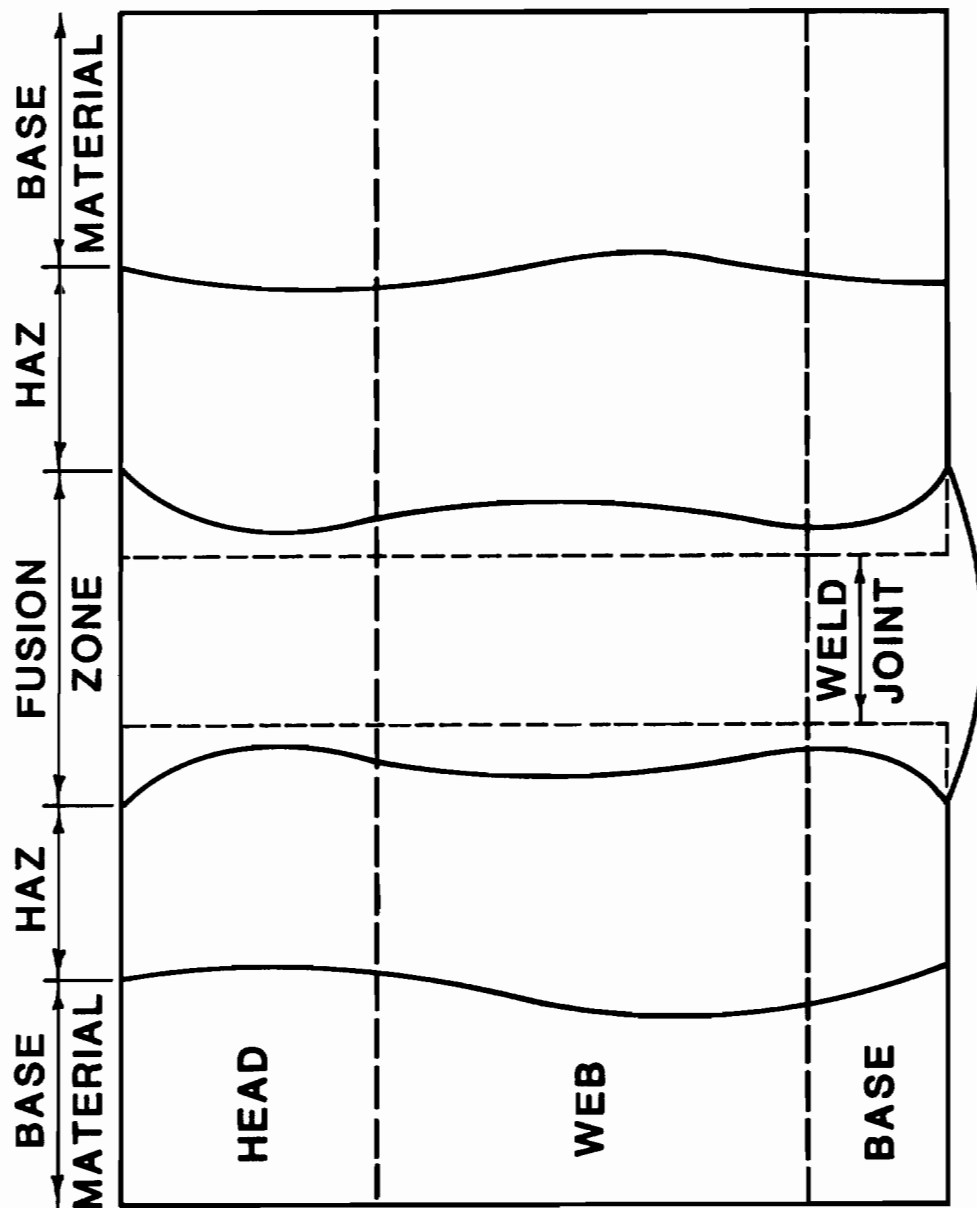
TYPICAL THERMIT WELD FUSION AND HEAT AFFECTED ZONE PATTERNS THROUGH THE LONGITUDINAL RAIL AND WELD CENTER SECTION (38).
